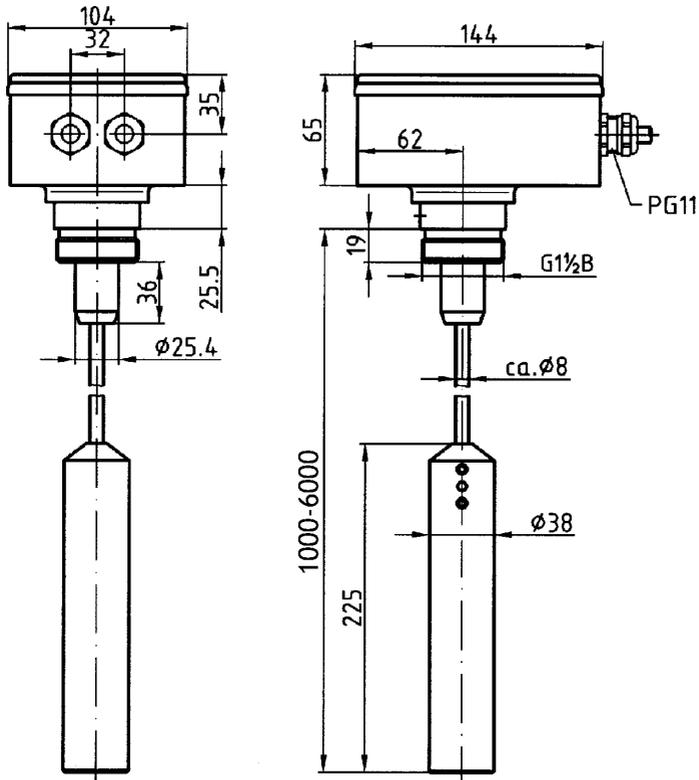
ENT 7 with flexible probe (dimensions in mm)
